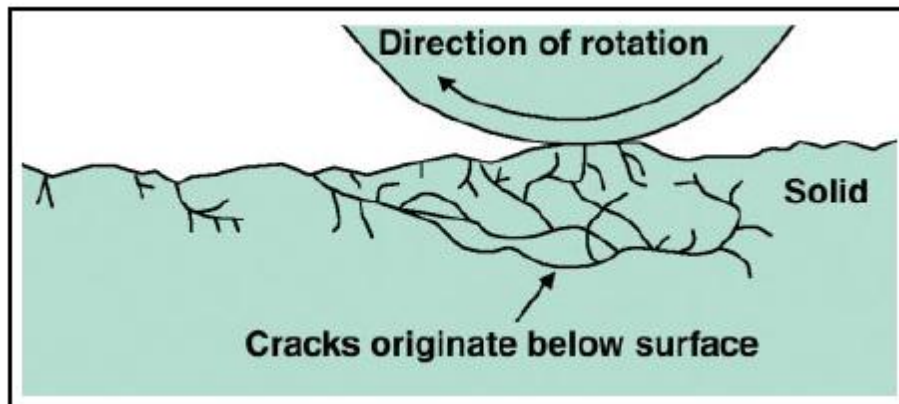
Schematic of Surface Fatigue wear mechanism.
